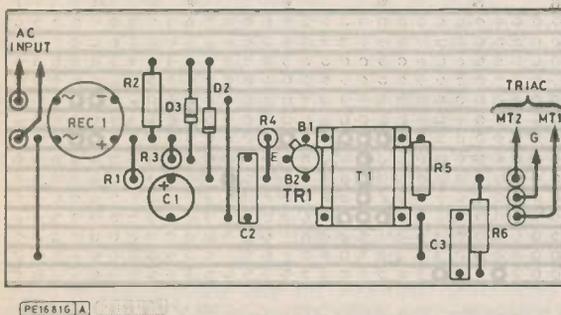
Layout of components on Veroboard, shown actual size. The triac is mounted separately
